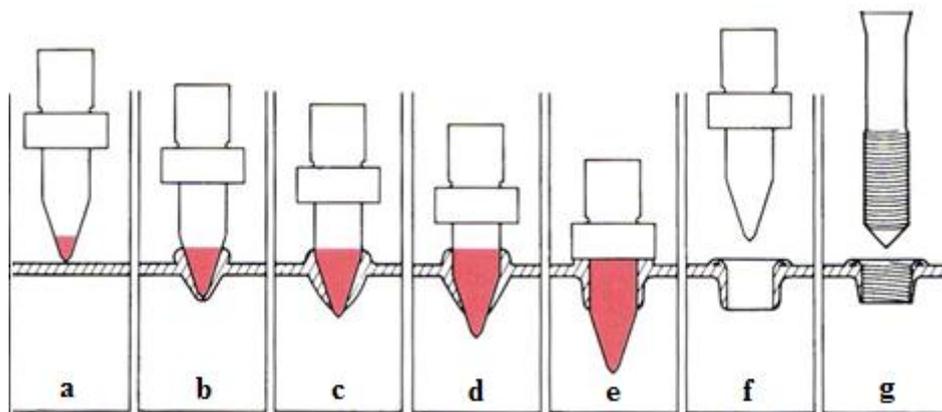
Friction drilling steps: a- initial contact; b- tool-tip penetration to the material; c- material flow; d- tool-cylindrical region penetration; e- collar forming; f- tool withdrawal; g- thread forming [2]
